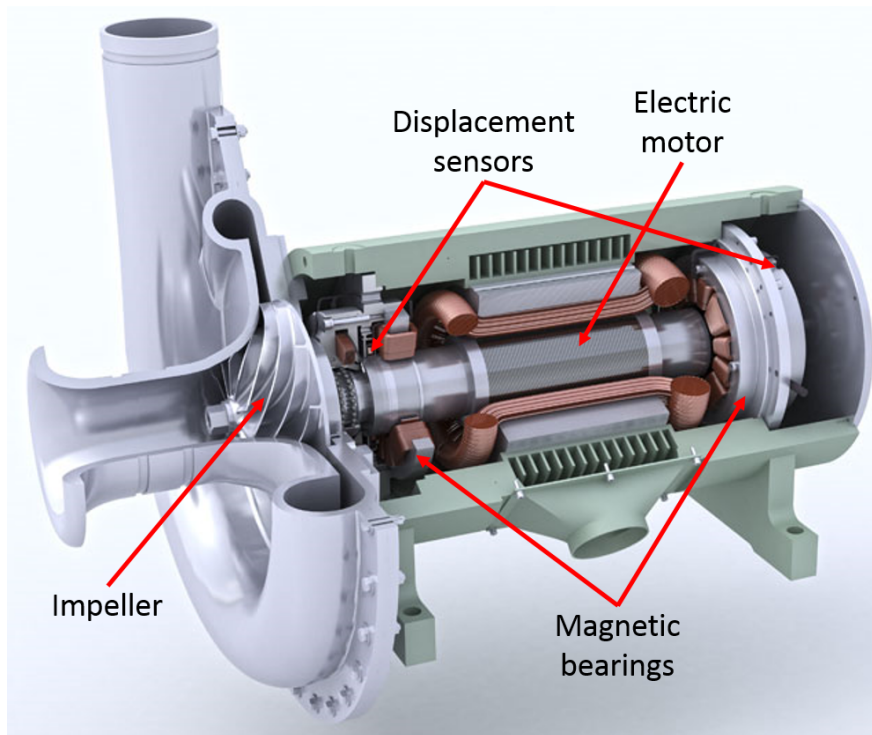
Rotating machine with active control system of the passive rotor type. Adapted from original image courtesy of SKF.
